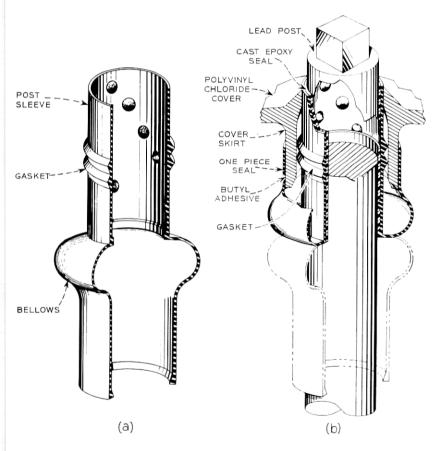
Final post seal assembly: (a) one-piece post seal, (b) post seal assembly.
